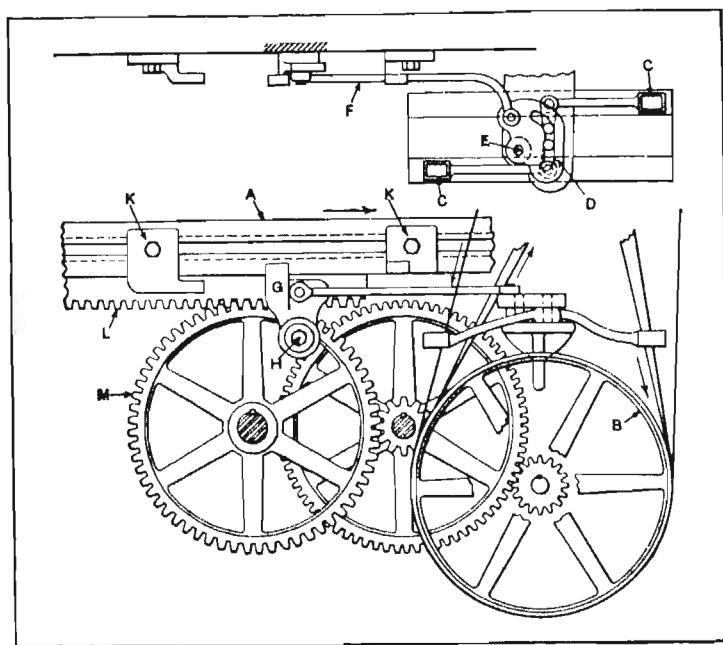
Reversing Mechanism of a Belt-driven Planer
